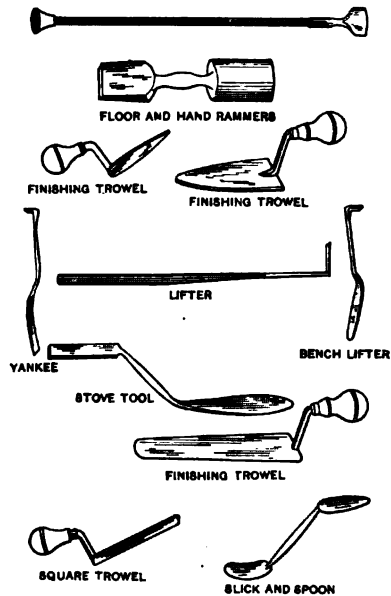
Tools Used in Hand Molding. (Stoughton.)
